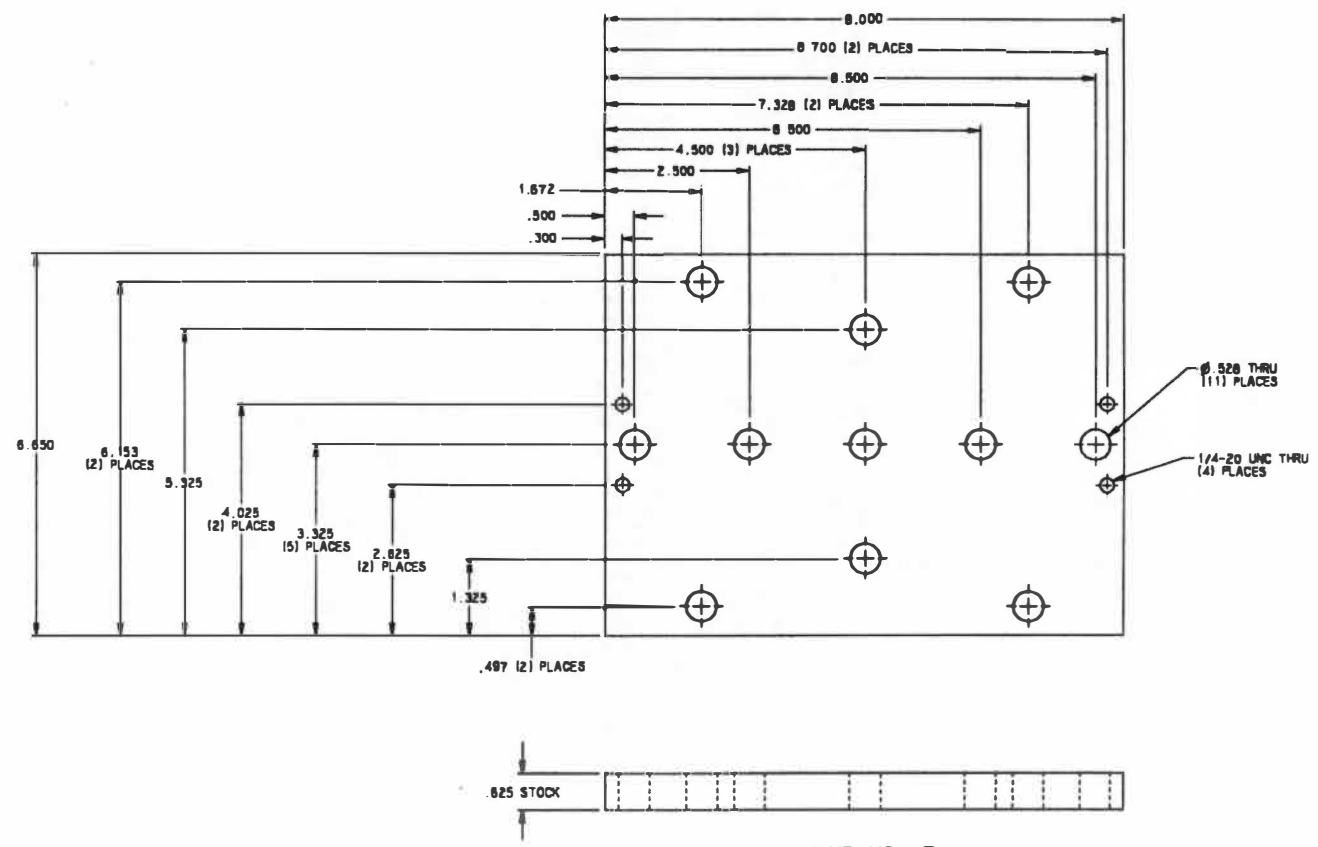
Fabrication drawing of beam and block test structure - sheet 4.
